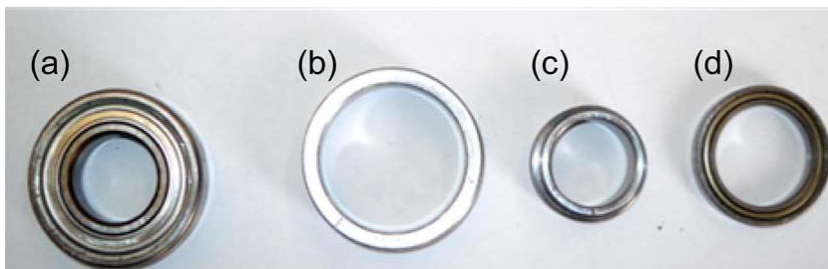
Picture of the bearings and bearing houses to create the mixed eccentricity failure. A) Original bearing b) Outer eccentric bearing house c) Inner eccentric bearing house d) New bearing
